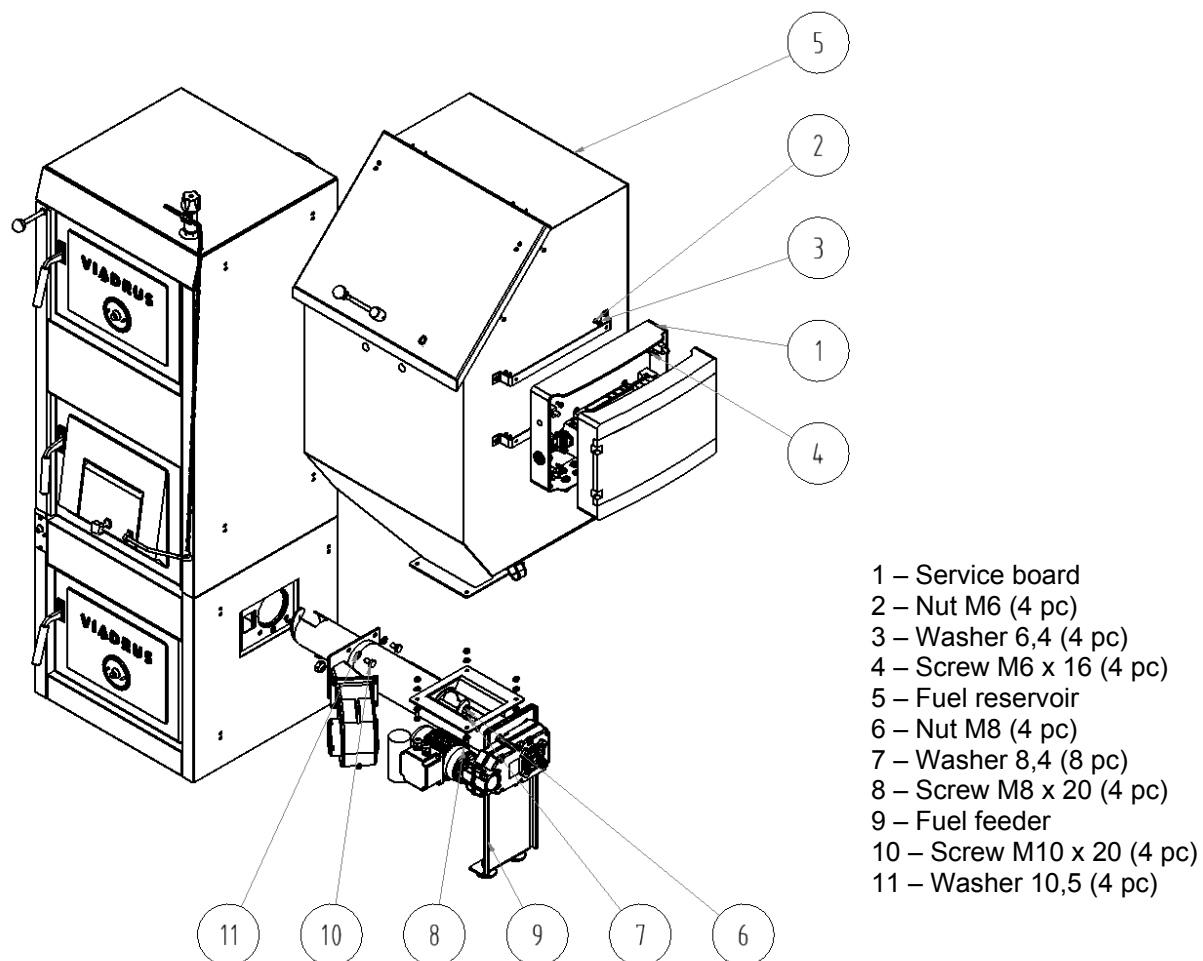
Boiler conversion from the right-hand to left-hand design- fuel reservoir and feeder disconnection
